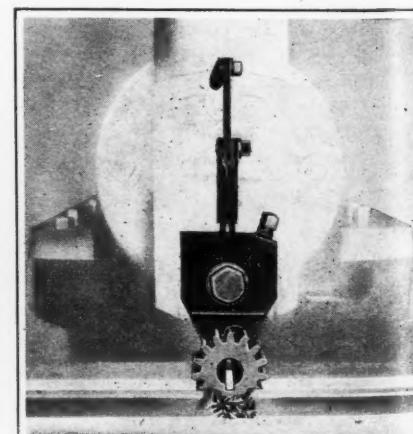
How Keyways are cut in Gears with Bruno Attachment
